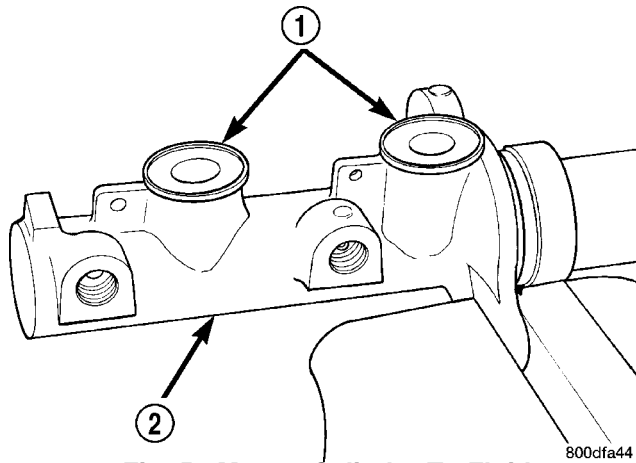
Master Cylinder To Fluid Reservoir Seal Grommets
